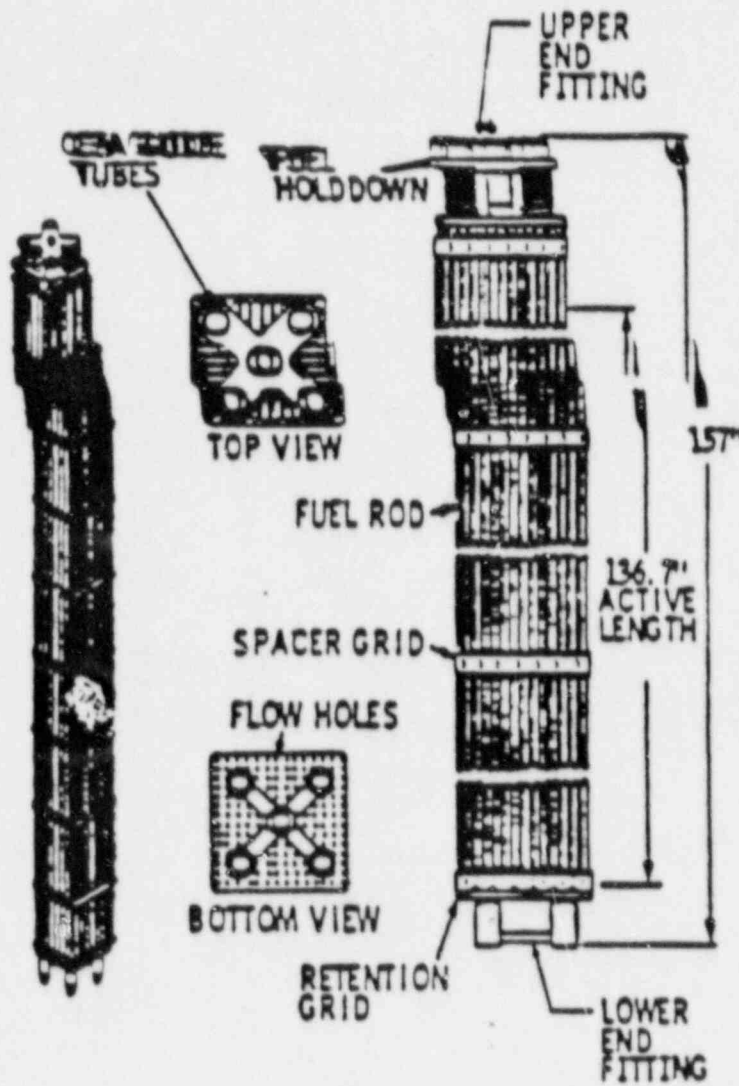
Combustion Engineering Fuel Assembly, Unit 1
